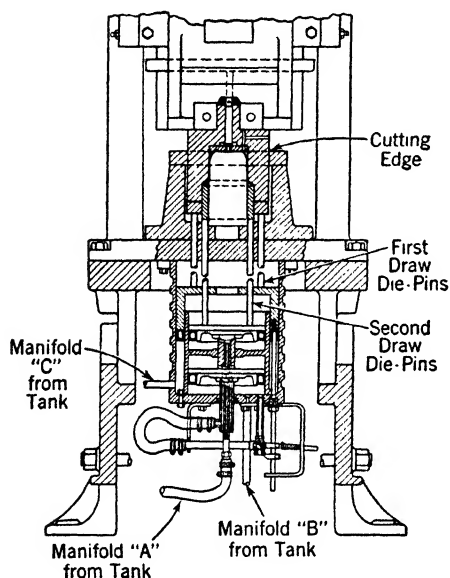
A combination (triple-action) blanking drawing and redrawing die in a single-action press with double-action Marquette pneumatic drawing cushion.
